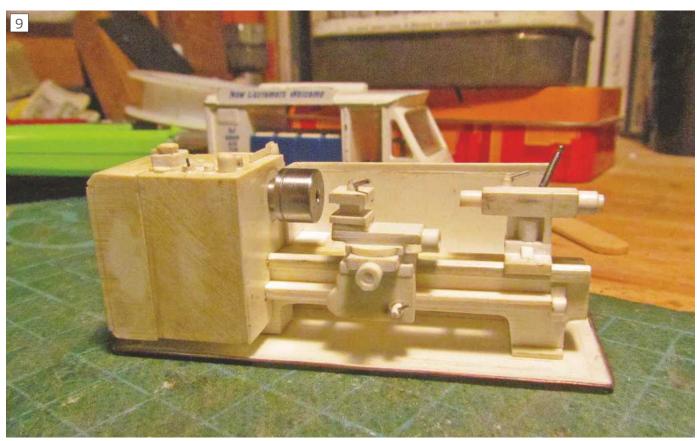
is my current machinery model (not yet finished). It is of the Seig
